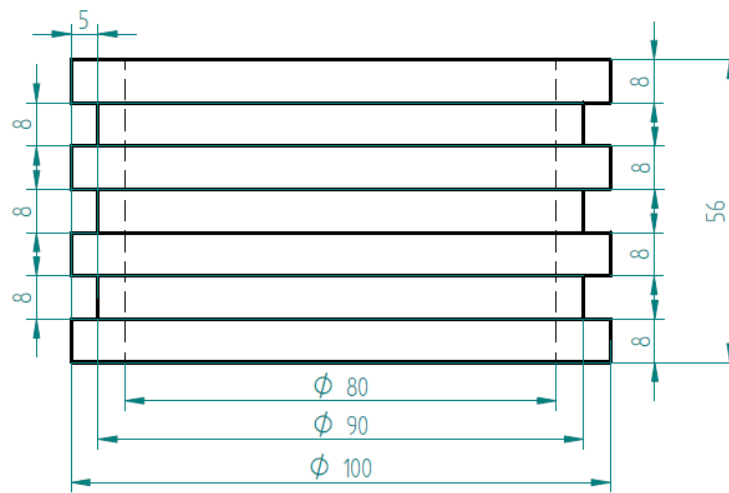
The cross section of the steel part of the rotor with dimensions.
